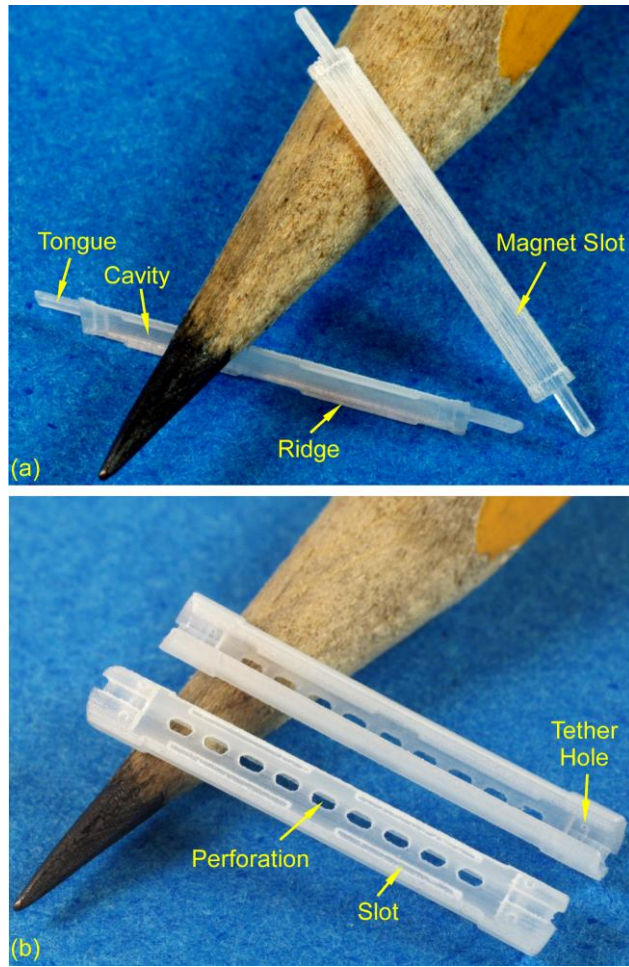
(a) Top and back views of the 3D printed Type S package base. (b) Top and back views of the 3D printed Type S package cover.
